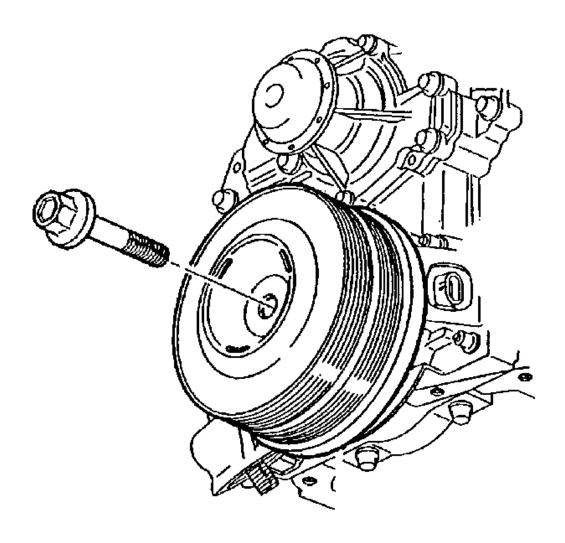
Crankshaft Balancer & Bolt Courtesy of GENERAL MOTORS CORP.
